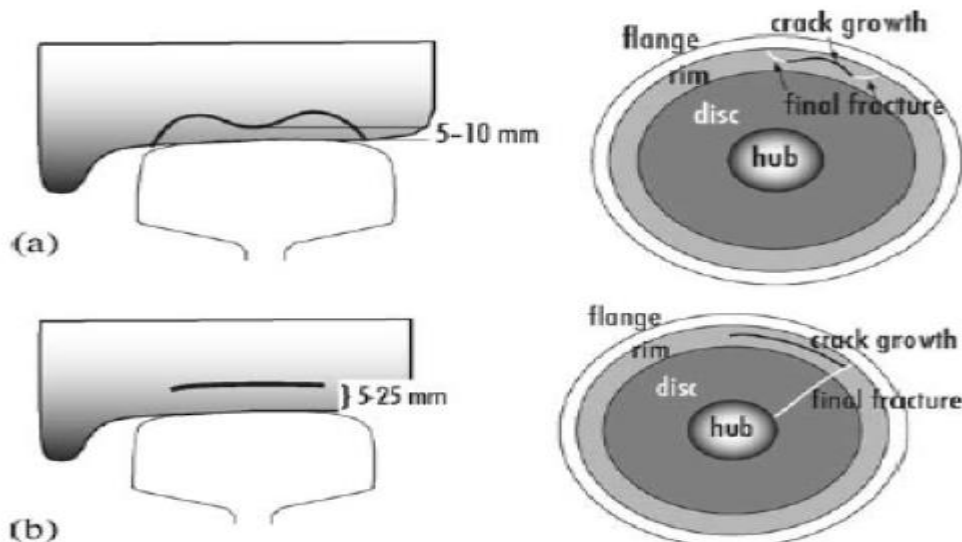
Typical appearance of sub surface fatigue cracks in railway wheels.(a) shallow initiation, (b) deep initiation [11].
